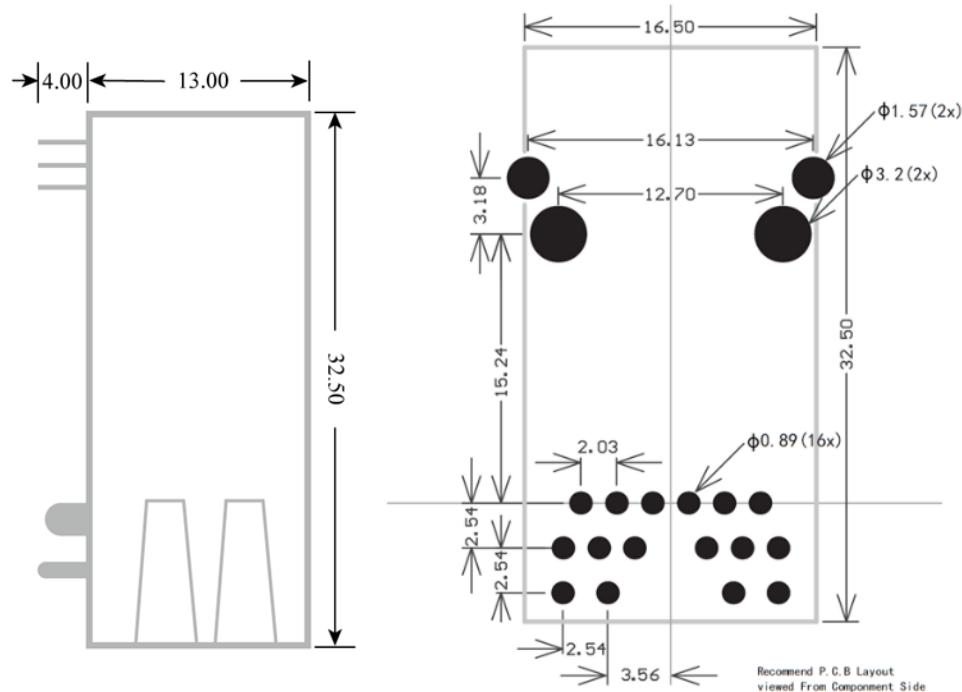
Mechanical dimension diagram of WIZ-IP75
